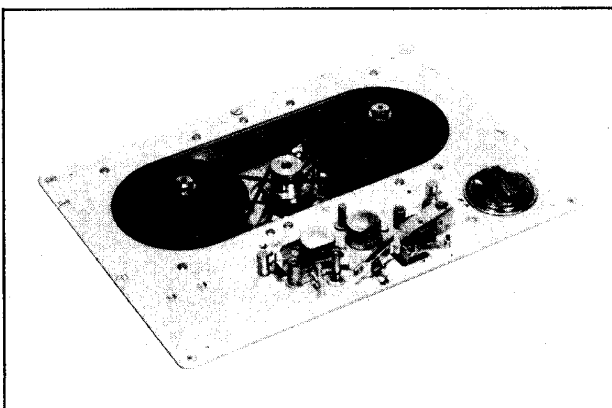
MECHANICAL CHASSIS, TOP VIEW
